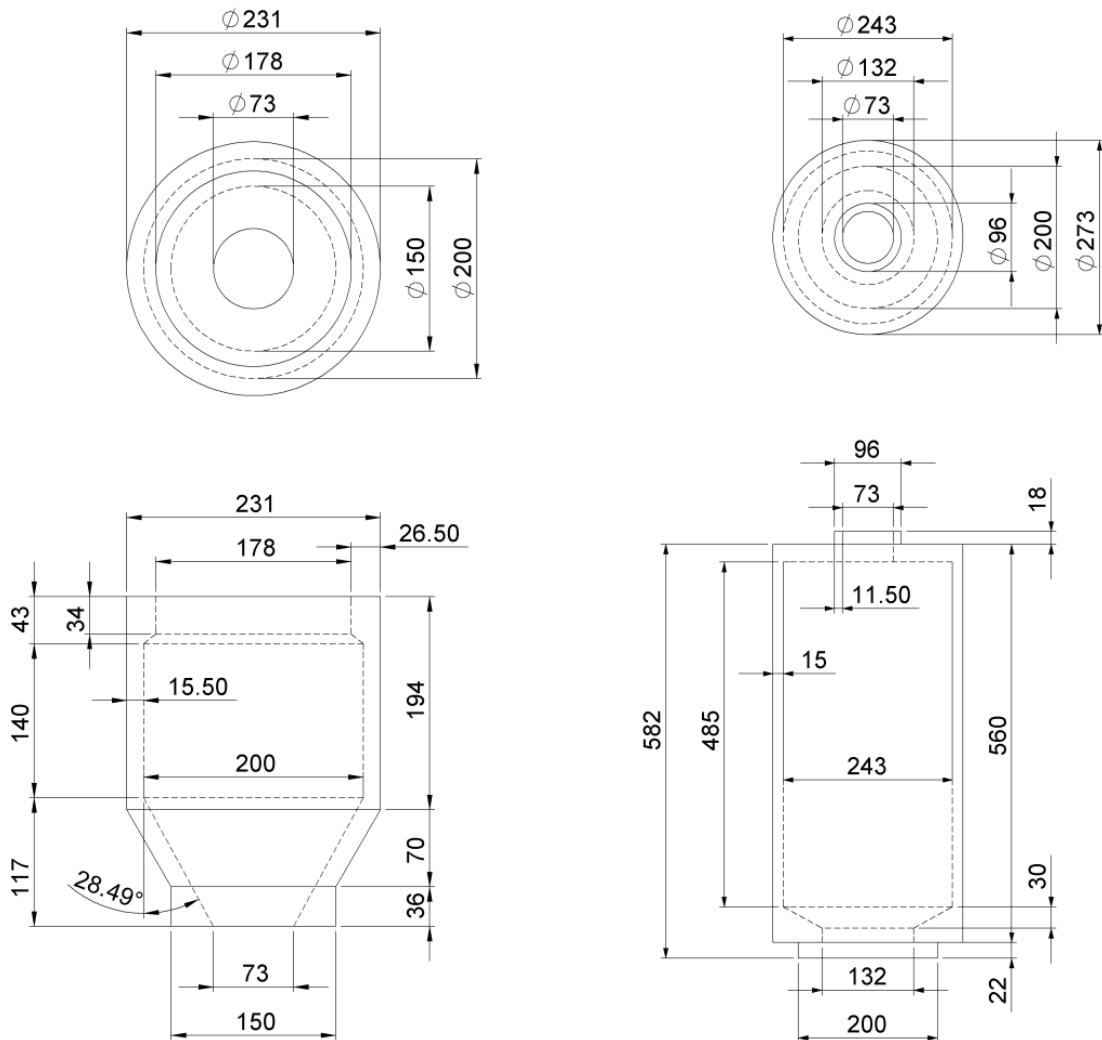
Geometry and dimensions of each of the hoppers (left) and the collection vessel (right) in mm.
